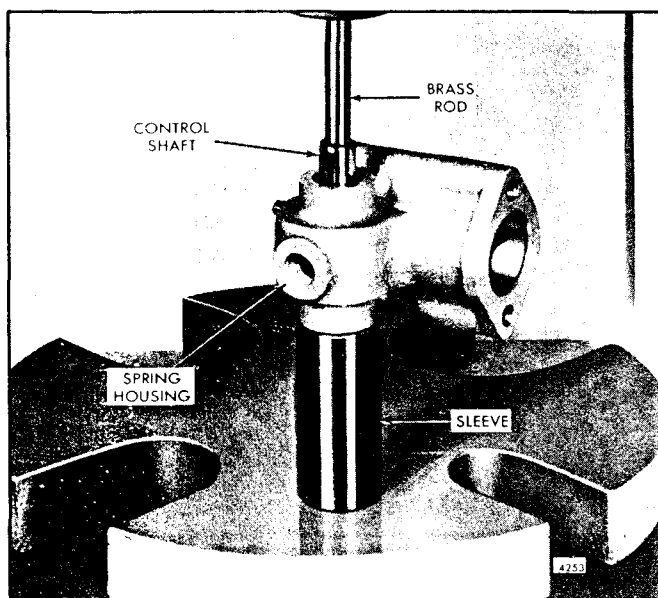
Removing Speed Control Shaft, Bearing and Cup plug from Governor Spring Housing
